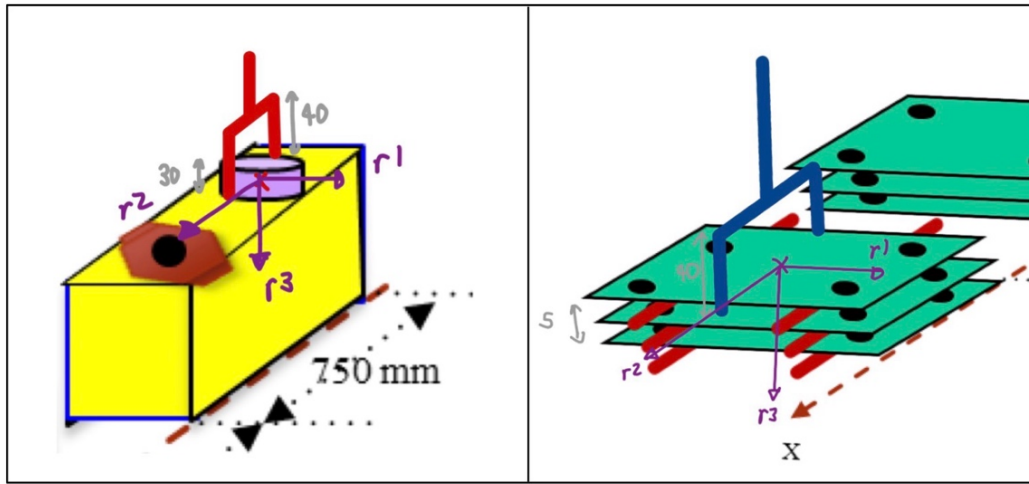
Tool position and orientation when picking up a wheel (left) and lower panel (right)
